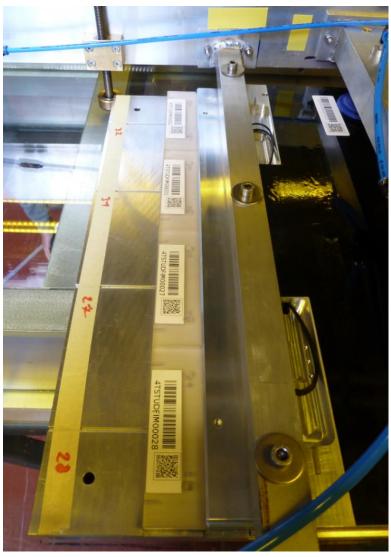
"Lifting and Turning device" aligned and fixed to the endplug
